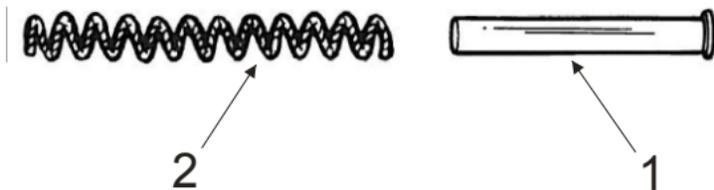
Recoil Spring Guide and Recoil Spring Inspection.
